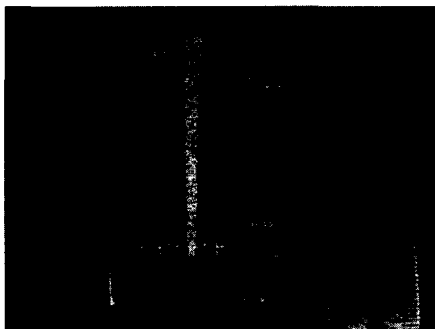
Transverse Cross Section for Electron Beam Welding (t47mm)
